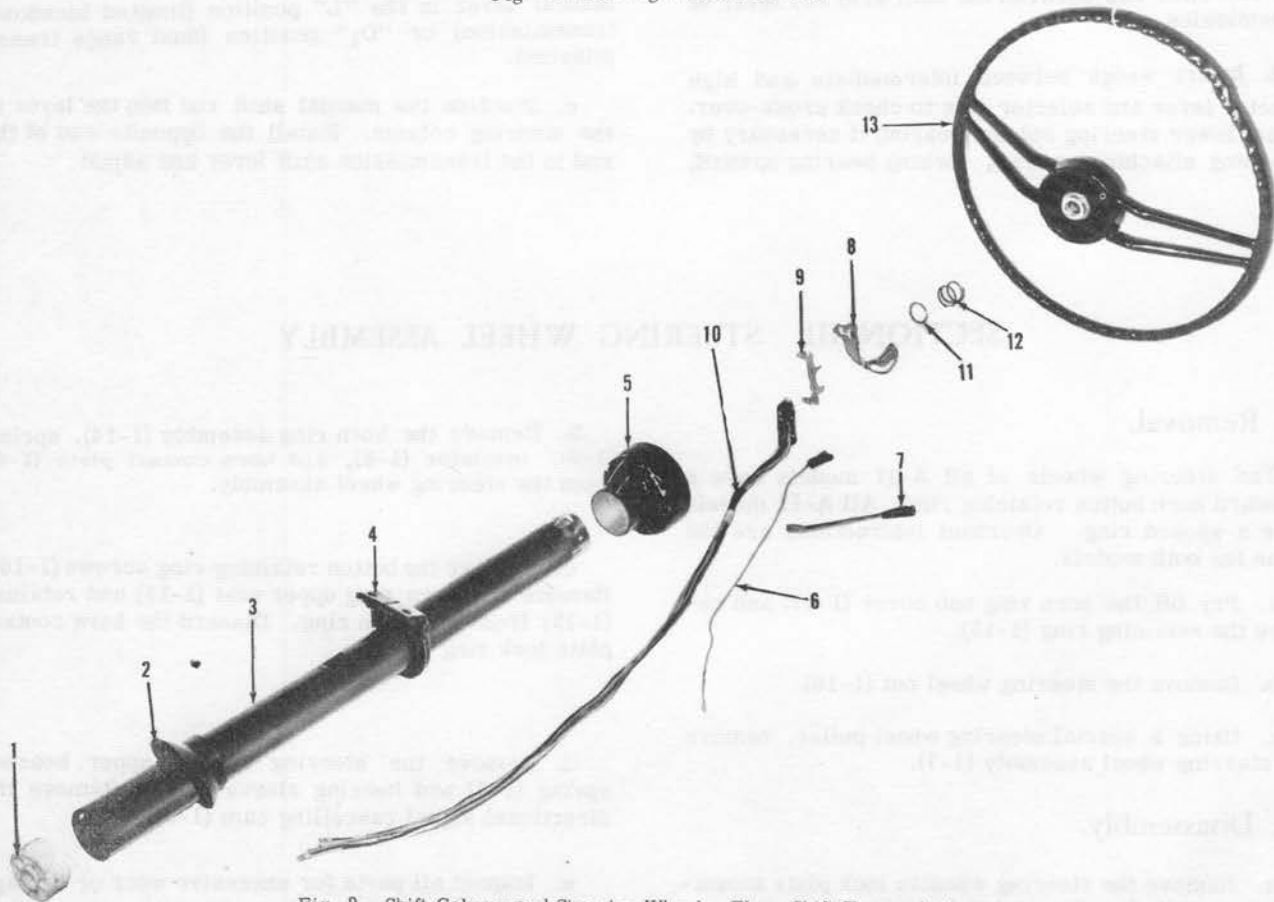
Shift Column and Steering Wheel - Floor Shift Transmission
